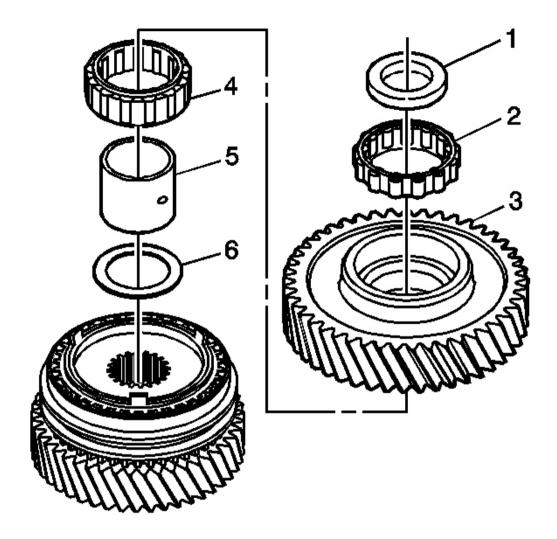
1st/2nd Gear Assembly & Components Courtesy of GENERAL MOTORS CORP.
